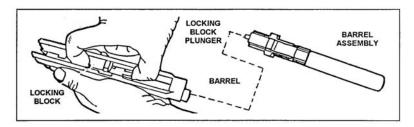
Removal of the locking block and barrel assembly
